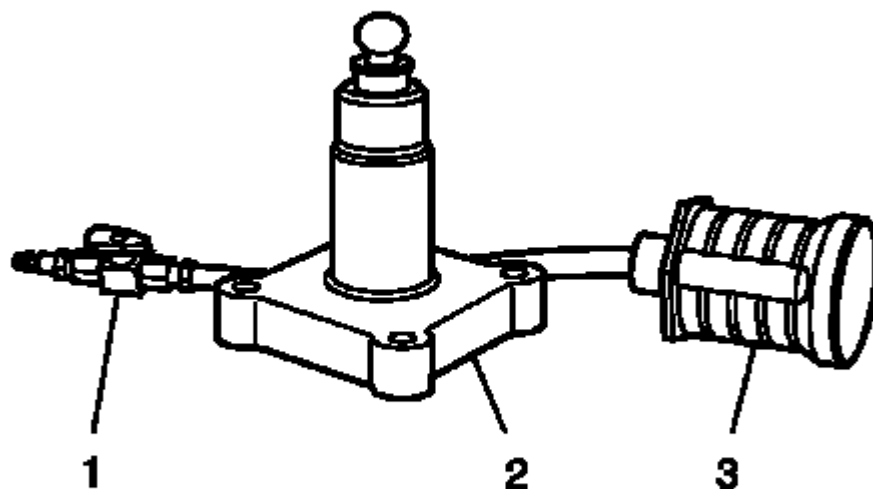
Identifying Cylinder Liner Trimming Tool Components (1 Of 2)
